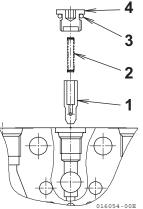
Check valve section (P1, P2 Inlet section for TSP System)
